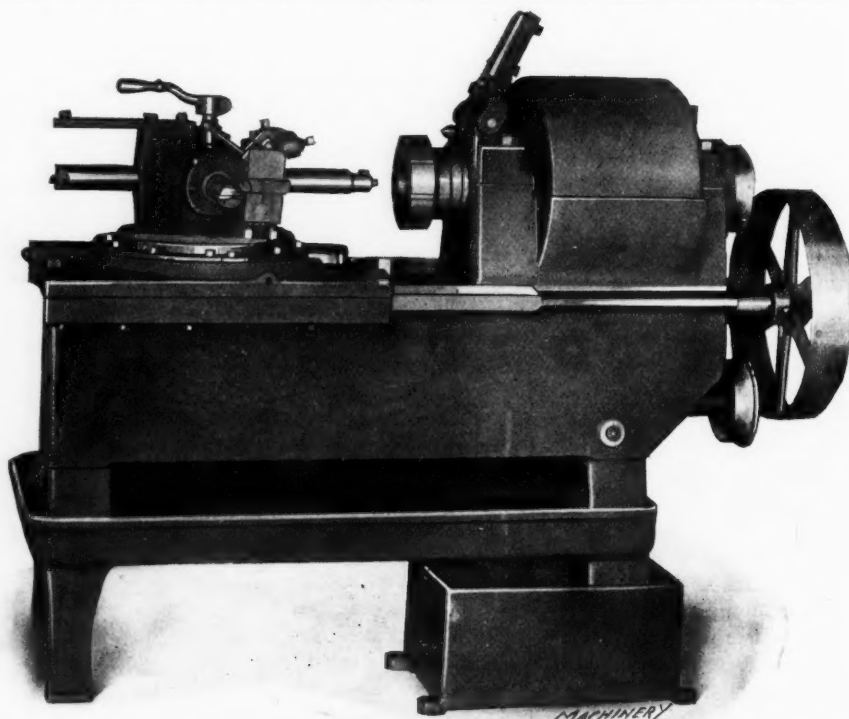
Opposite Side of Blood Turret Lathe shown in Fig. 1
